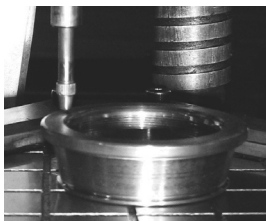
Photography of the measurement of height of bearing ring [B] made by MT_2 tool
